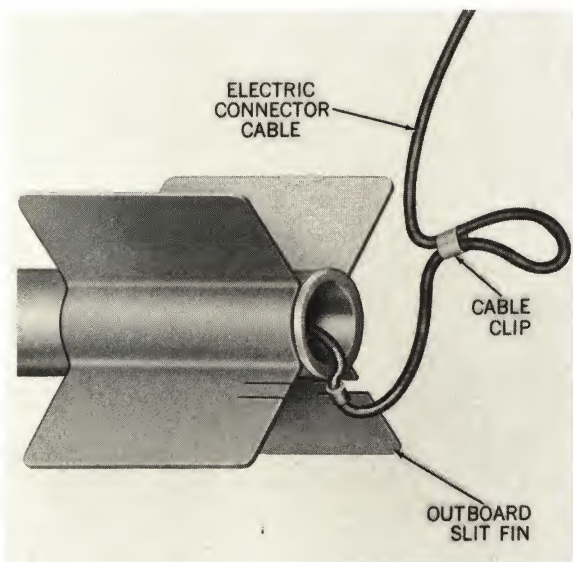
Electrical Connector Cable Snubbed to Fin of 2.25-Inch Rocket.
